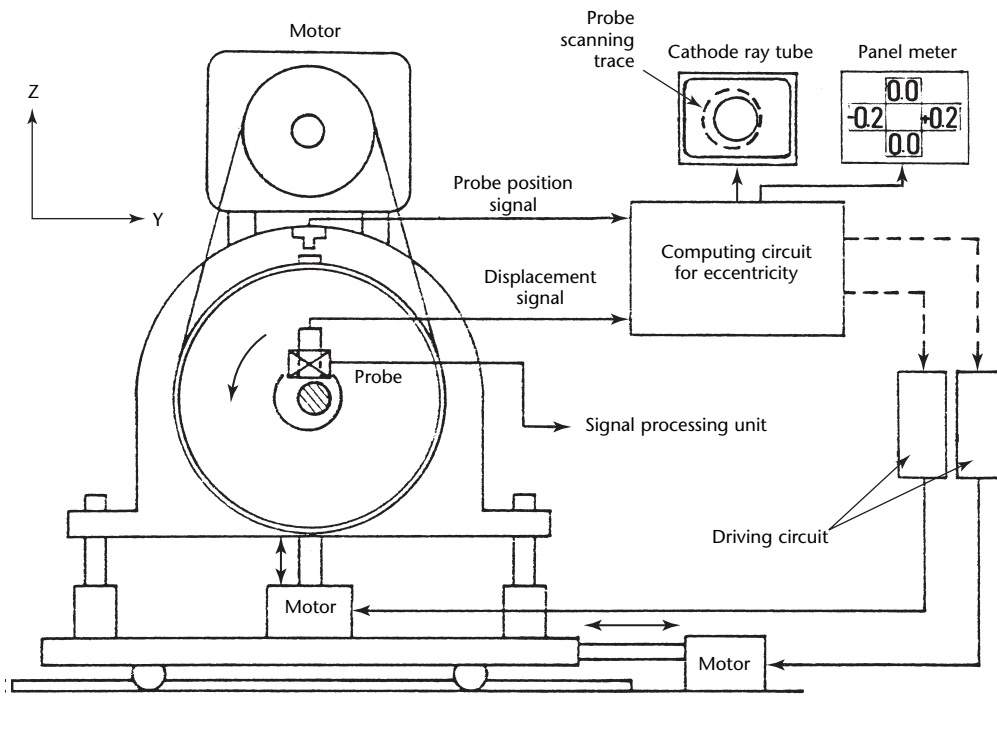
Block diagram for automatic alignment of rotating probe machine.
